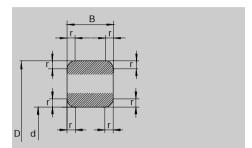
Radial Bearings(Except tapered roller bearings)
